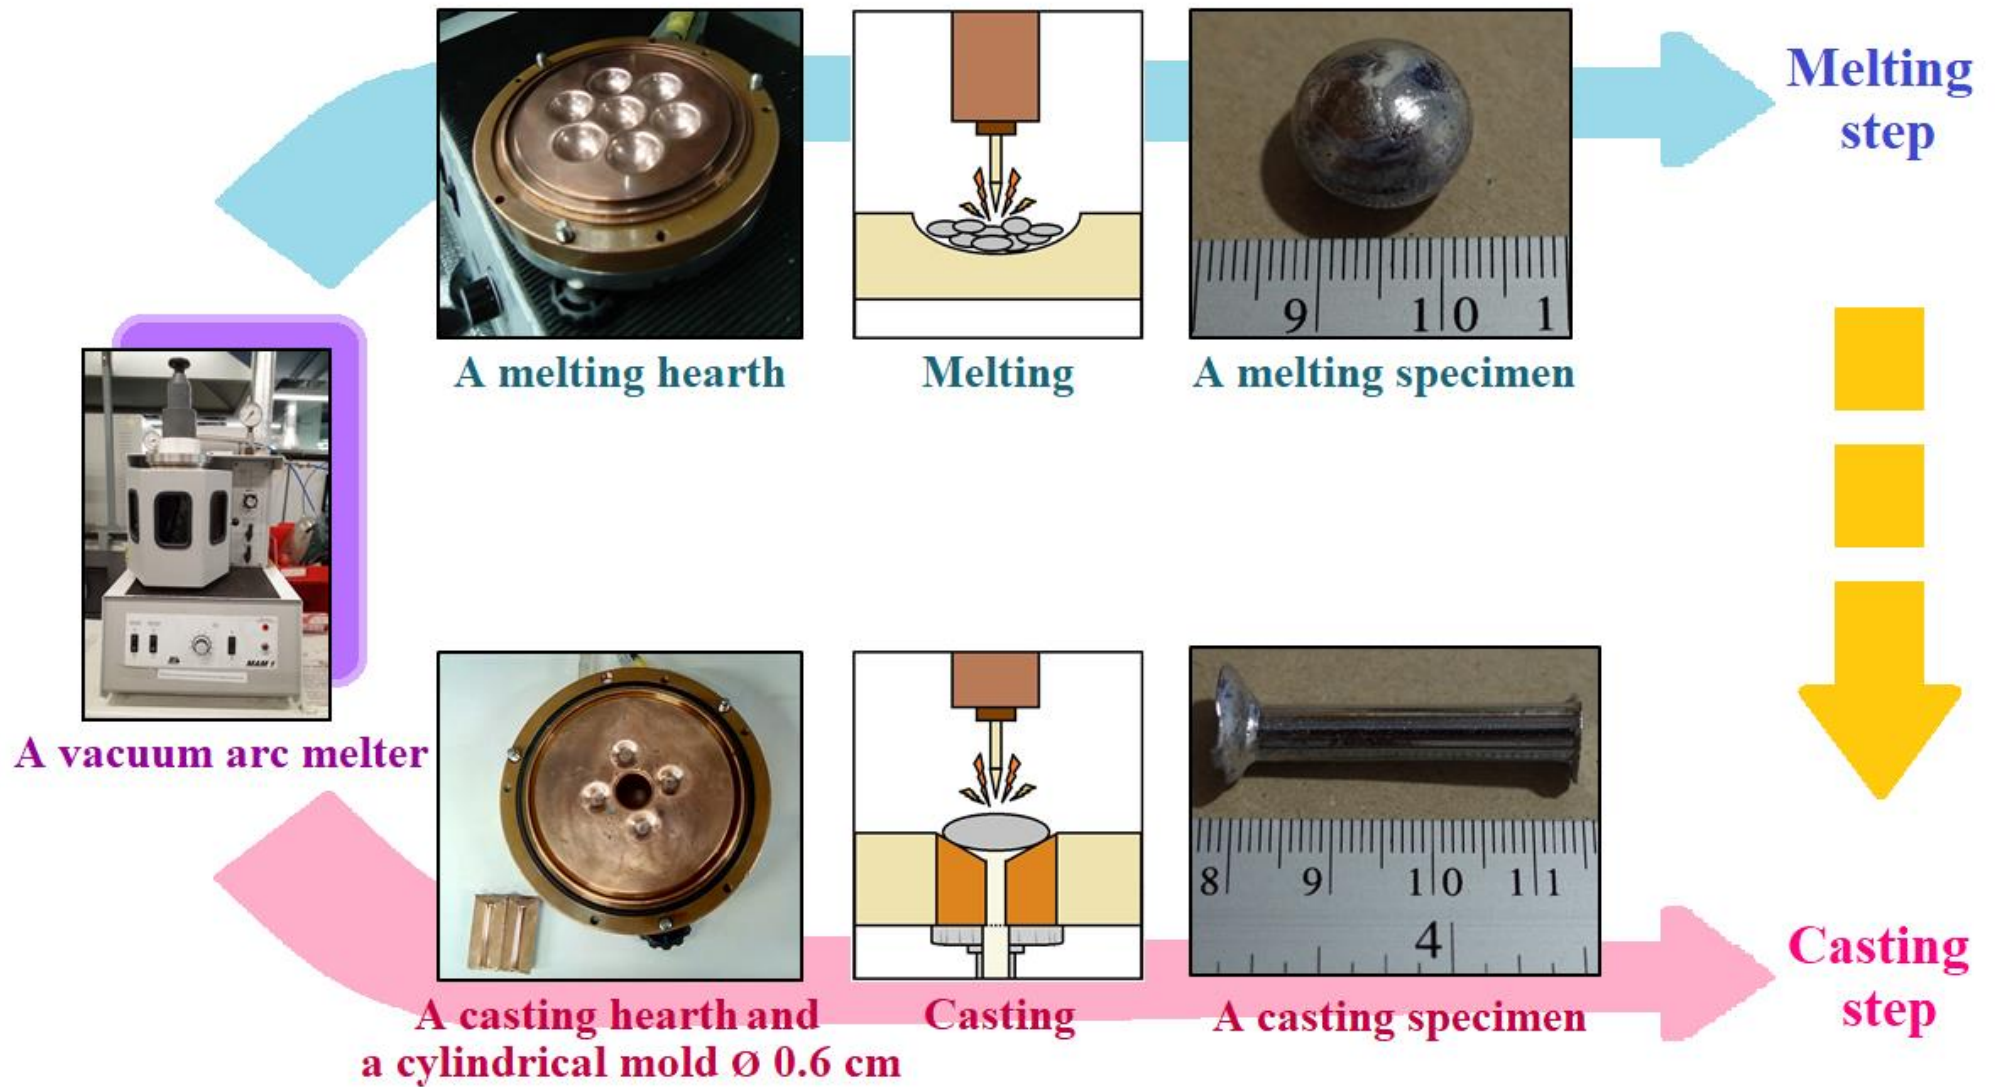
Schematic diagram of the sample fabrication by vacuum arc melting technique.
